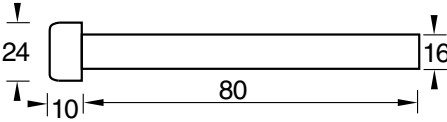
Schematic of the bolted joint. All dimensions in mm.
